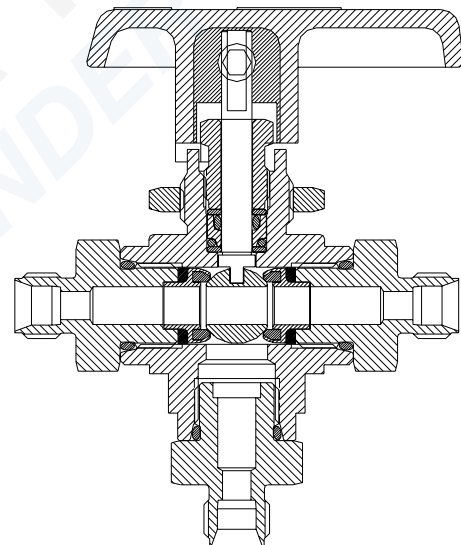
Three-Way B Series Ball Valve with O-Ring Packing Cross Sectional View
